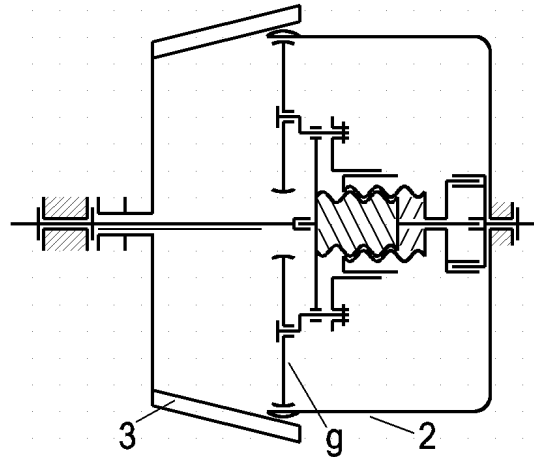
Providing the radial force by pinion-sector gear driven eccentric rollers [3]
